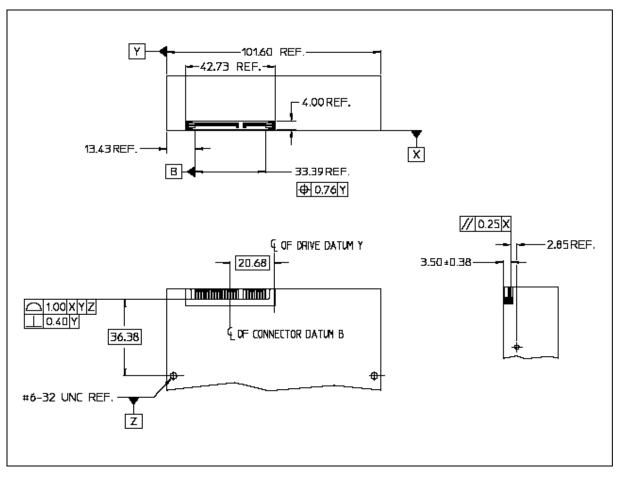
Device plug connector location on 3.5 inch bottom mounted device
